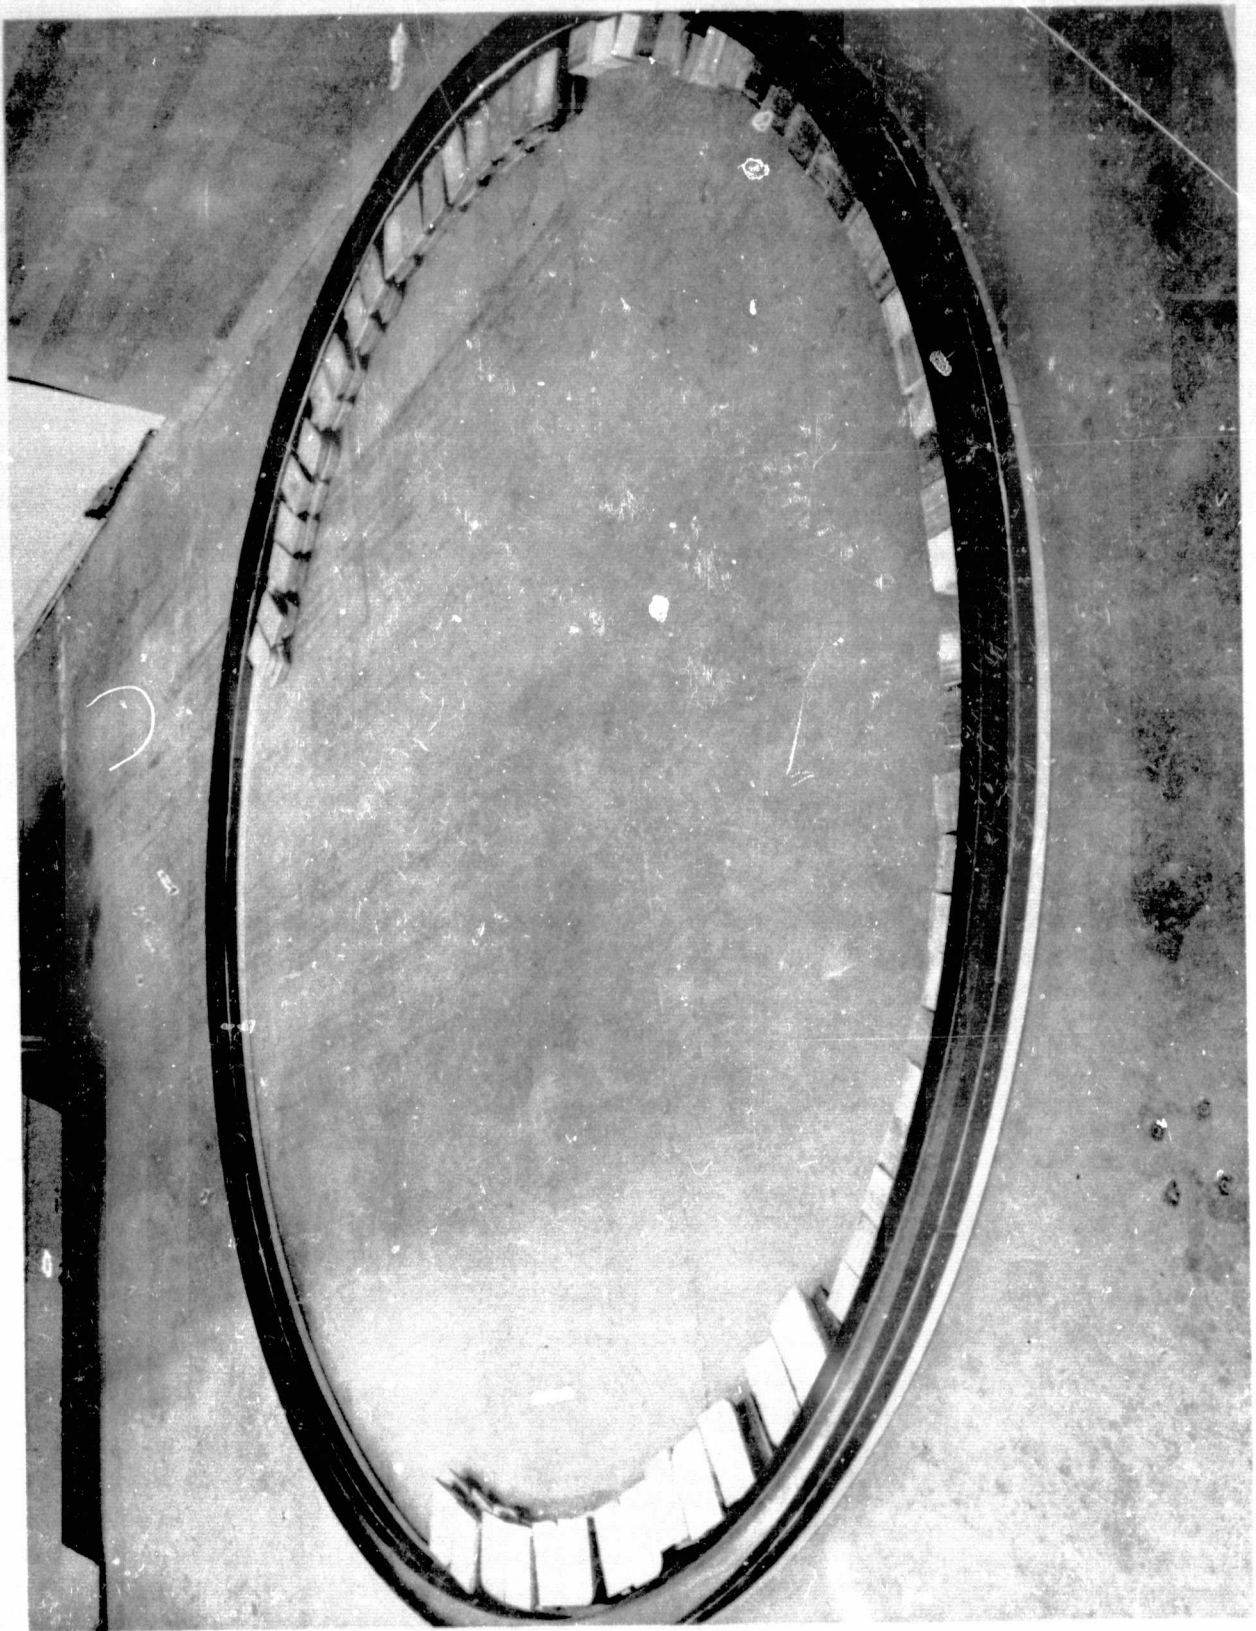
Ring Assembly - Assembled Graphite Fabric Channels
